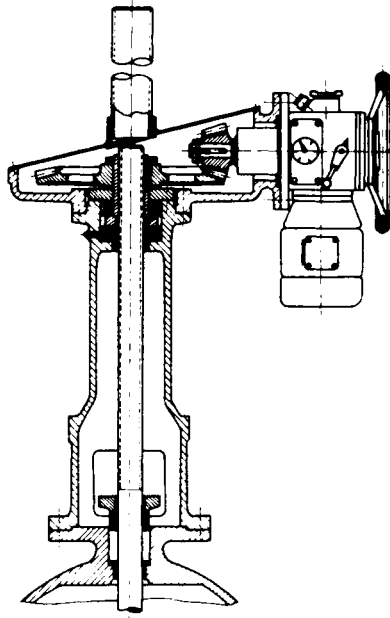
Bevel-gear gate-valve stem drive, operated by electric motor
